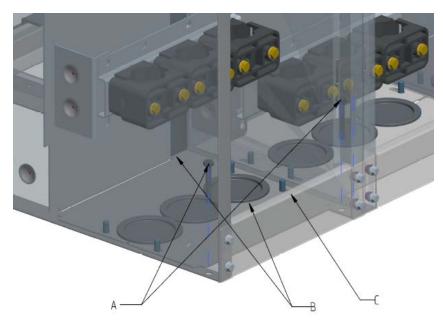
Positioning: Anchoring a DR-6C medium-voltage cubicle
